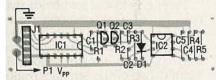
EPROM PC BOARD. Mount all parts except J1 on the component side of the board; mount J1 on the foil side.
